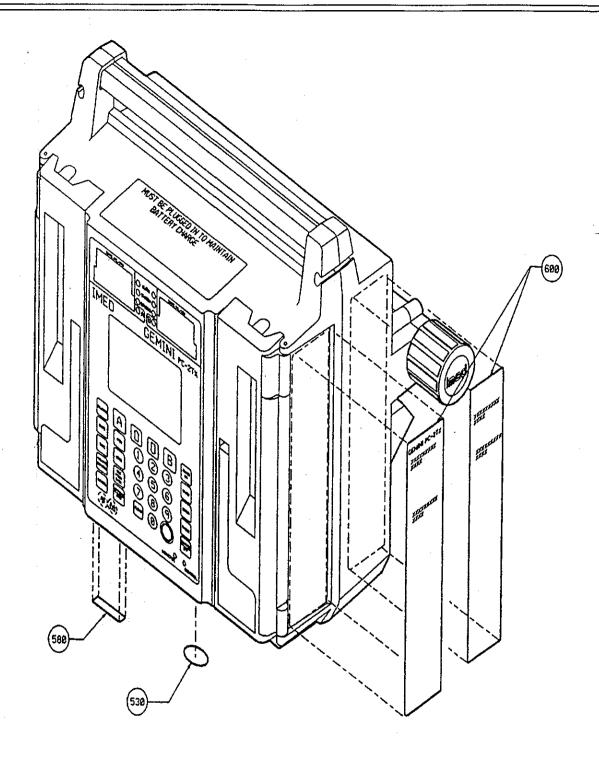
Parts Identification PC-2TX Pump Assembly
